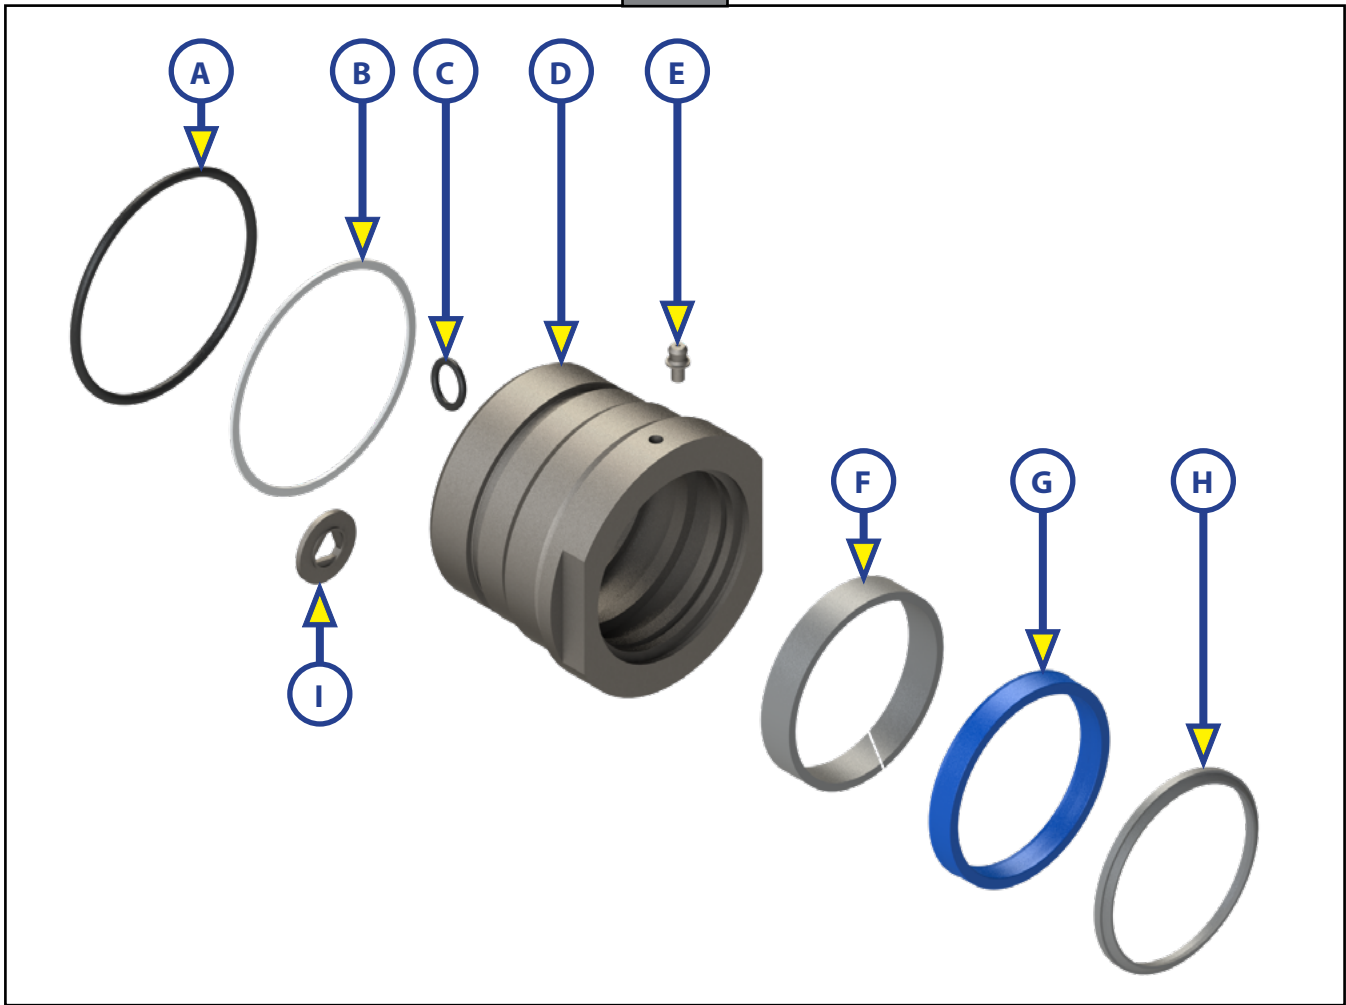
depicts an example of a typical rod guide section detail for 16,000lb Power Gear leg part numbers 359050, 359050, 359494 and 366423.
